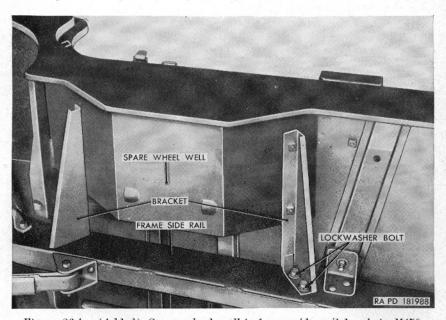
(Added) Spare wheel well-to-frame side rail brackets M170.
